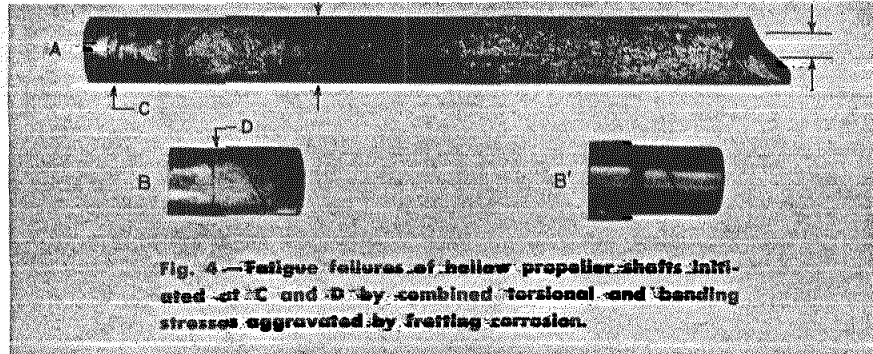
Fatigue failures of hollow propeller shafts initiated at C and D by combined torsional and bending stresses aggravated by fretting corrosion.
